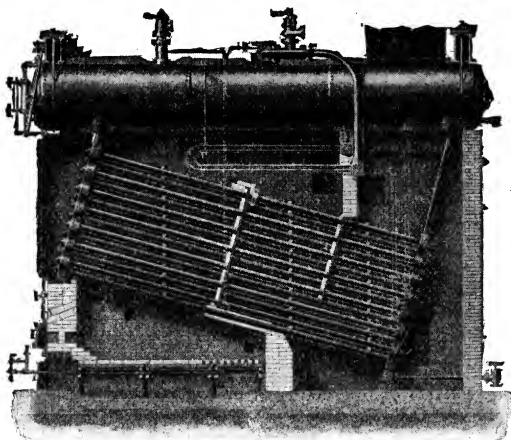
,477.—Babcock and Wilcox water tube boiler and setting. Type W.I.F. having inclined headers.
